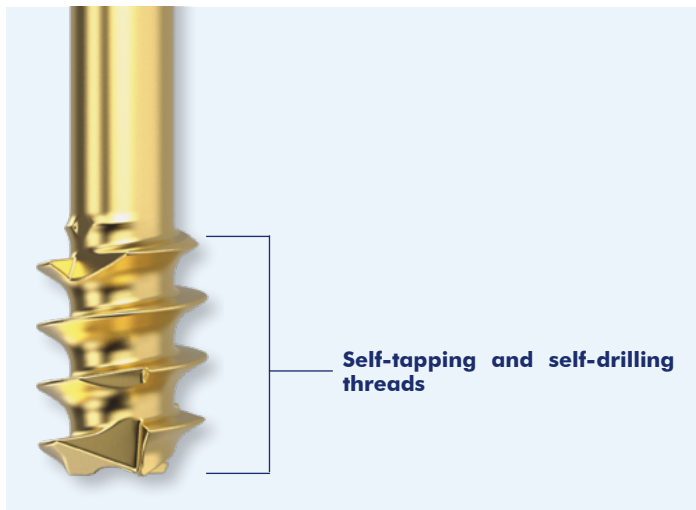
Thread design. Example illustration for 4.0 mm (gold).
